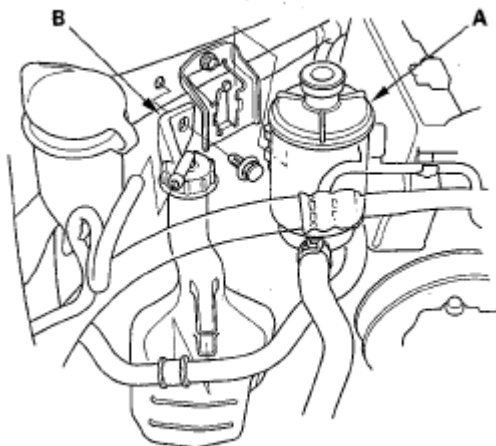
Identifying Power Steering Fluid Reservoir And Coolant Reservoir
